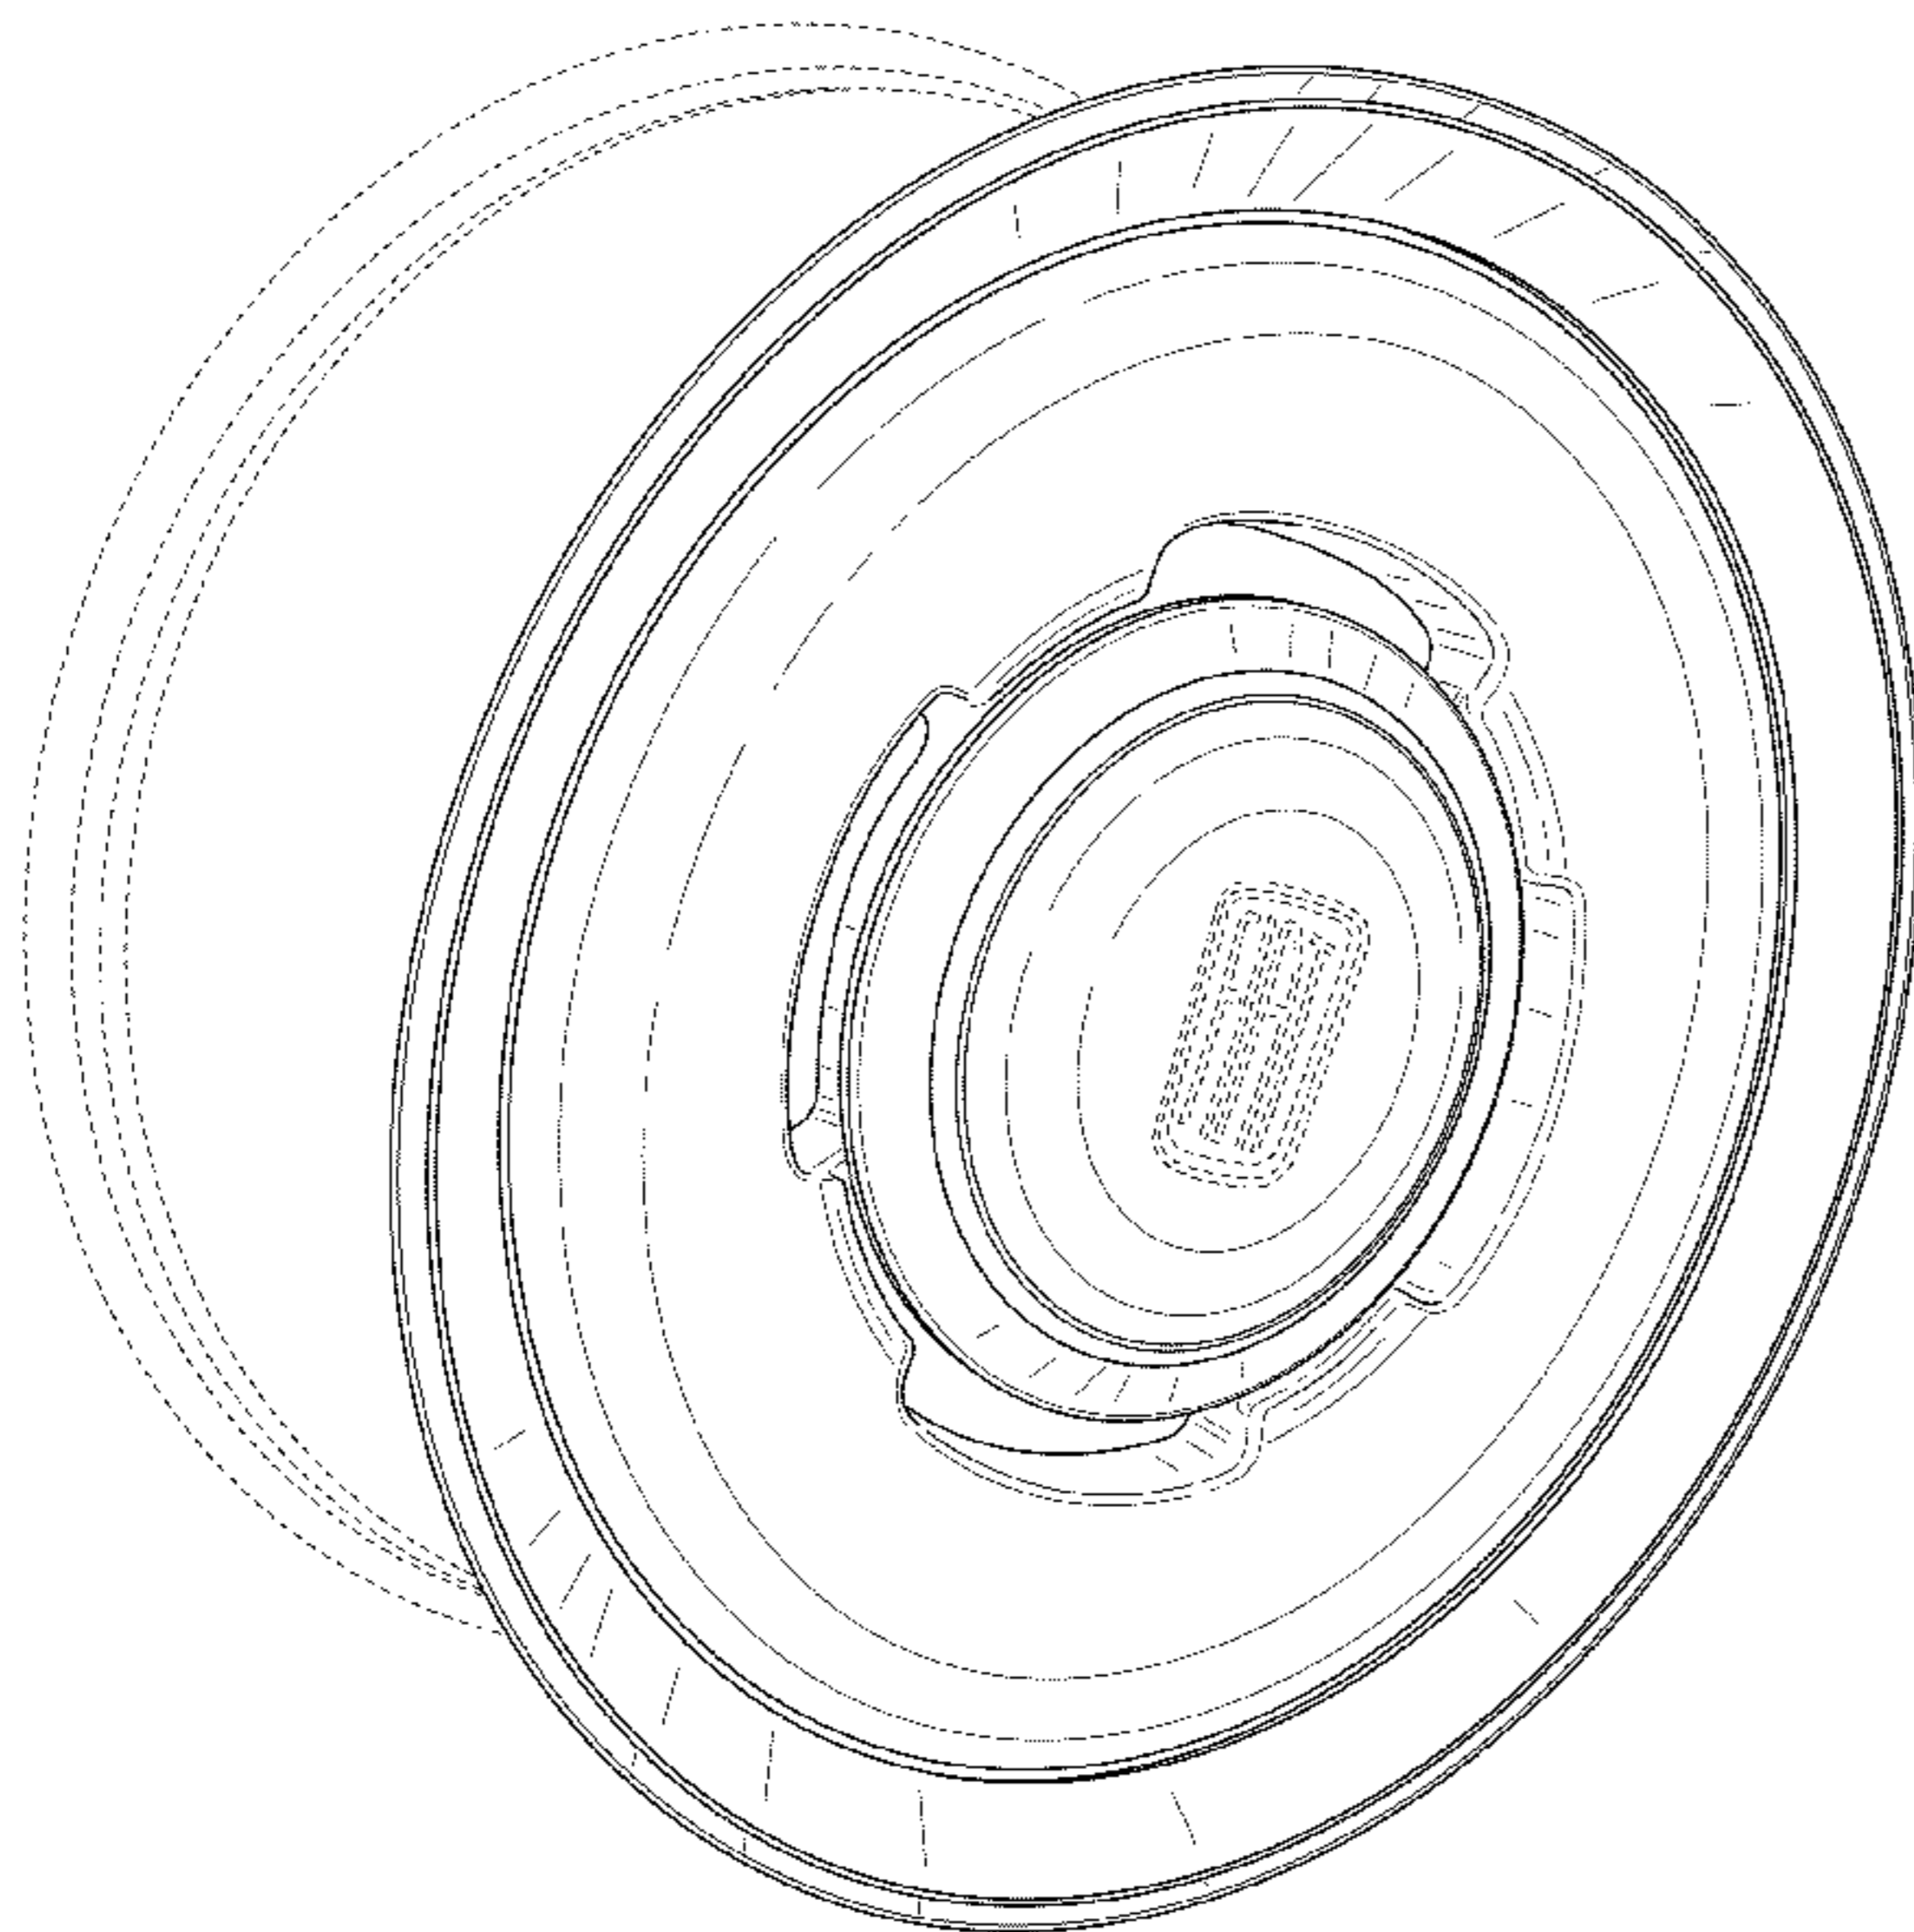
is a left side perspective view of an automobile wheel showing our new design;
